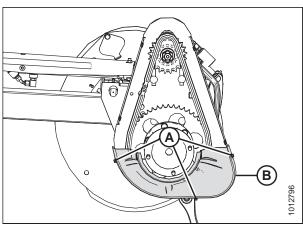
Lower Drive Cover (Upper Cover Removed)
